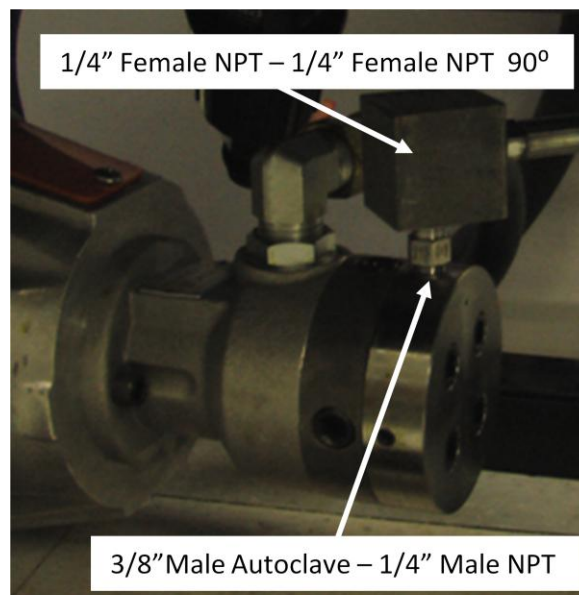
Hose threading into the upper section of the high pressure nozzle
